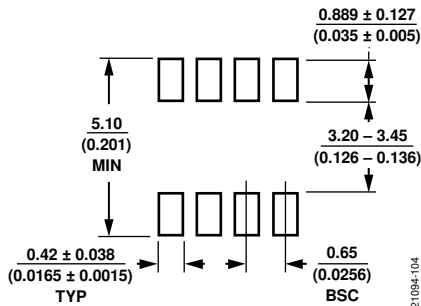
RM-8 (8-Lead MSOP) Recommended Solder Pad Layout
